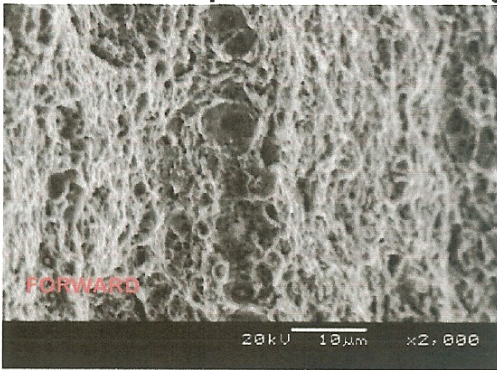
Lab opened fracture showing single tensile overload surface (x2000, SEM)
